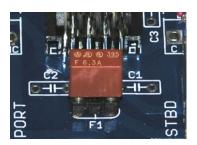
Fuse Installed in PCB Fuse Socket
